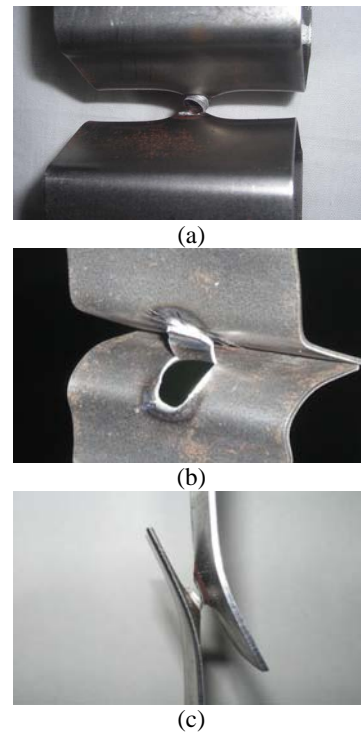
Failed spot weld joint connection. (a) U tension coupon. (b) Coach peel coupon (c) Lap shear coupon
